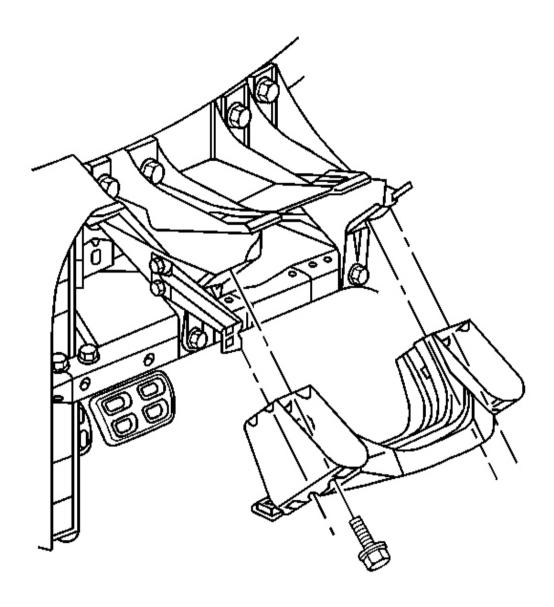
Electrical Connectors & I/P Wiring Harness Courtesy of GENERAL MOTORS CORP.
